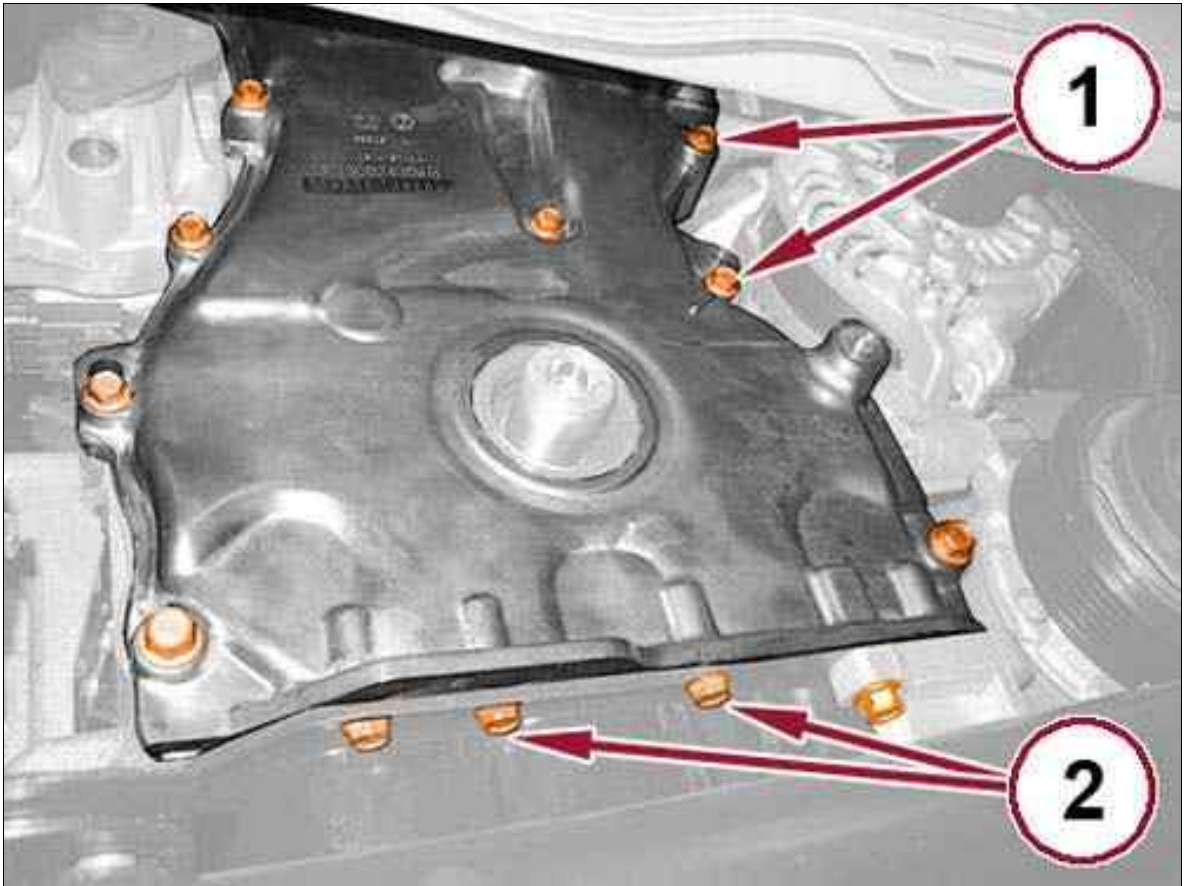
Engine Timing Cover To Cylinder Head Upper Bolts
